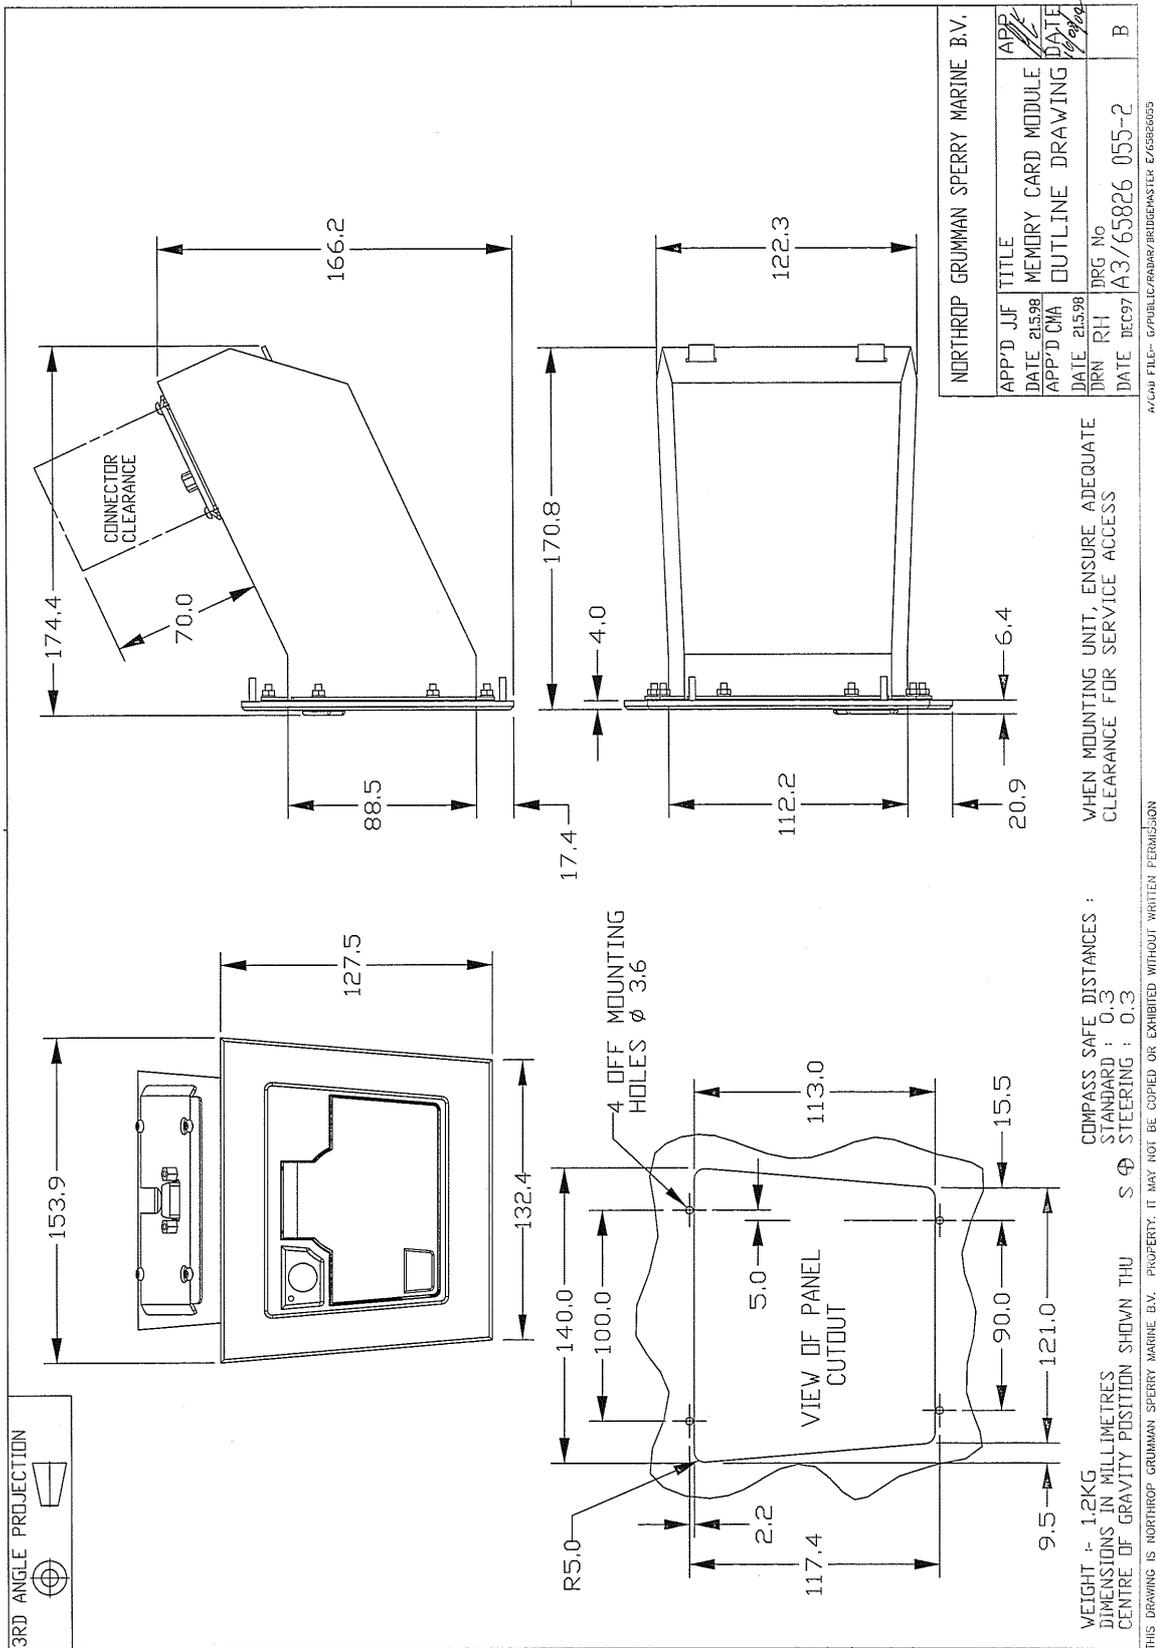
Memory Card Module Outline Drawing (154mm version)
